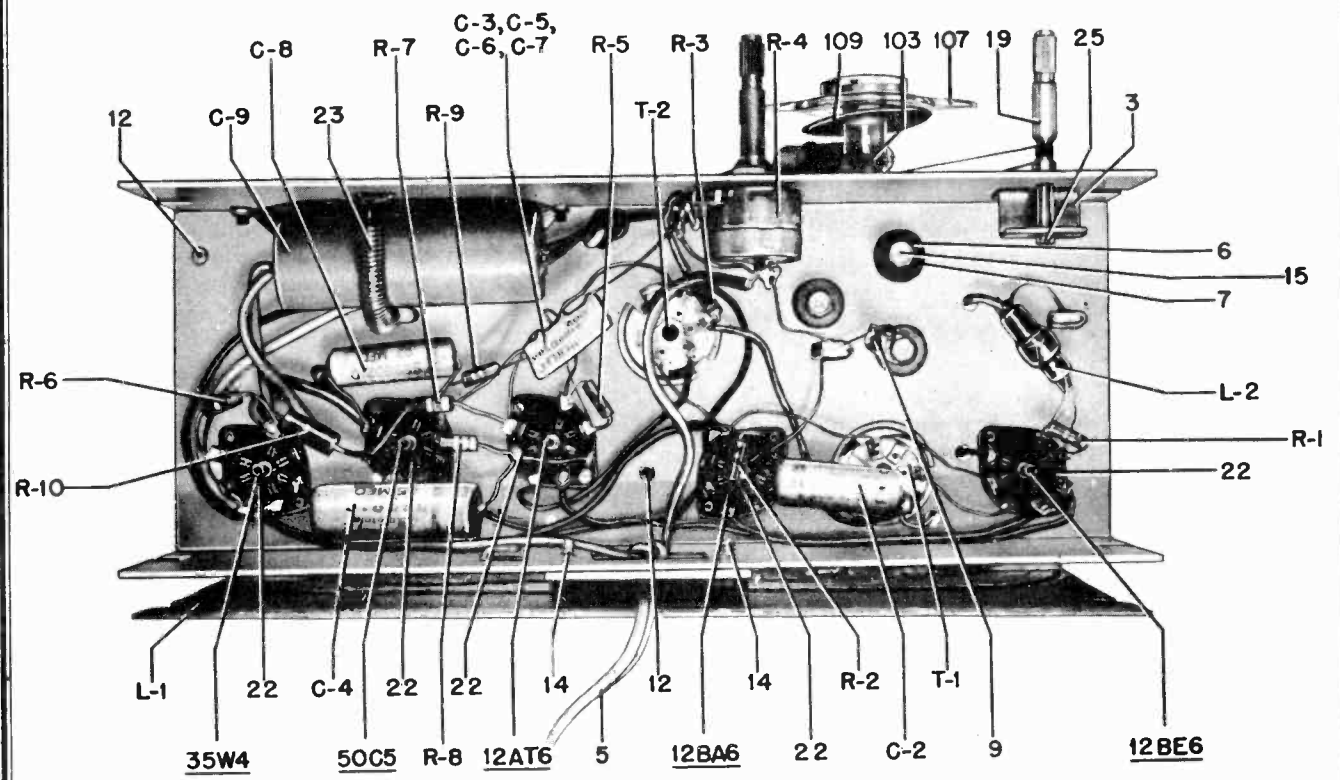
CHASSIS PARTS LOCATION - BOTTOM VIEW
